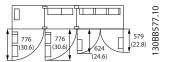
Front Clearance of IP21/IP54 Enclosure Type, Frame Size F13
